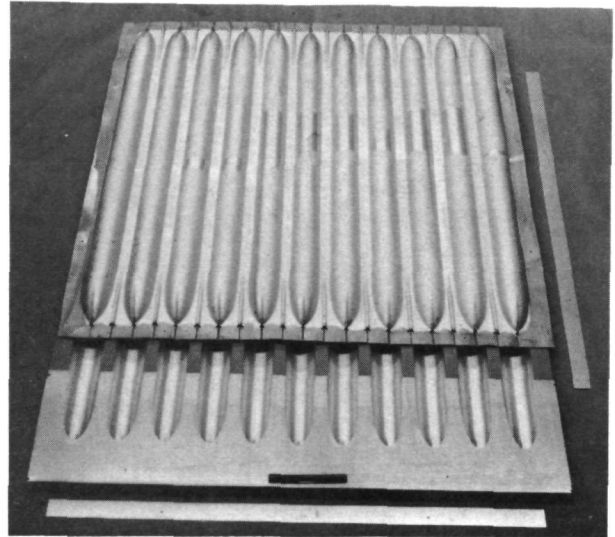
CIRCULAR TUBE ASSEMBLY BONDING LAY-UP
